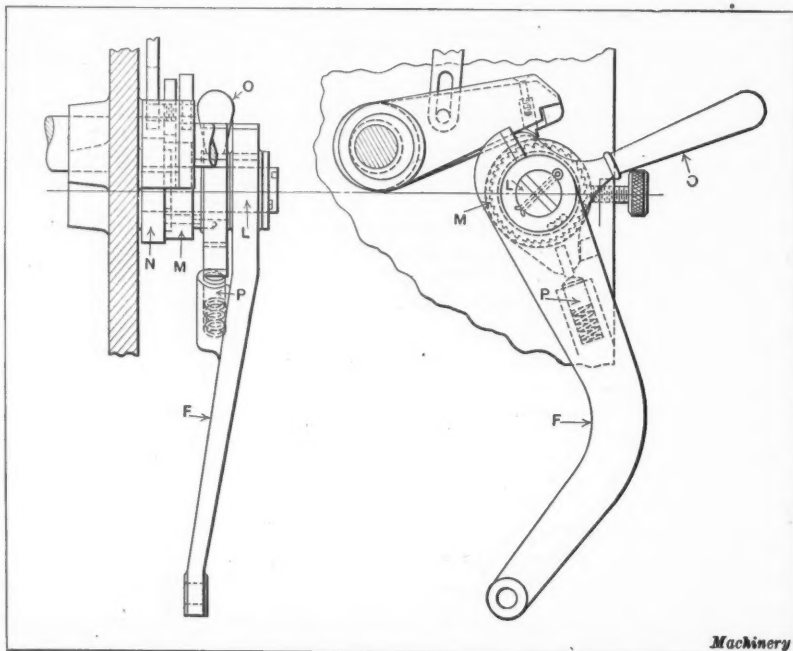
Design of Timing Mechanism provided on Machine illustrated in Fig. 2
